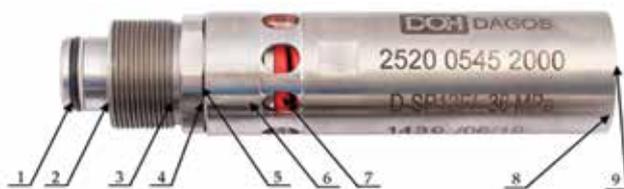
Construction of a piston safety valve with a gasket and spring pressure: 1-round seal, 2-connection stub, 3-round piston seal, 4- piston, 5- piston pressure plate, 6-casing, 7-spring, 8-thrust plate, 9-adjustment screw.
